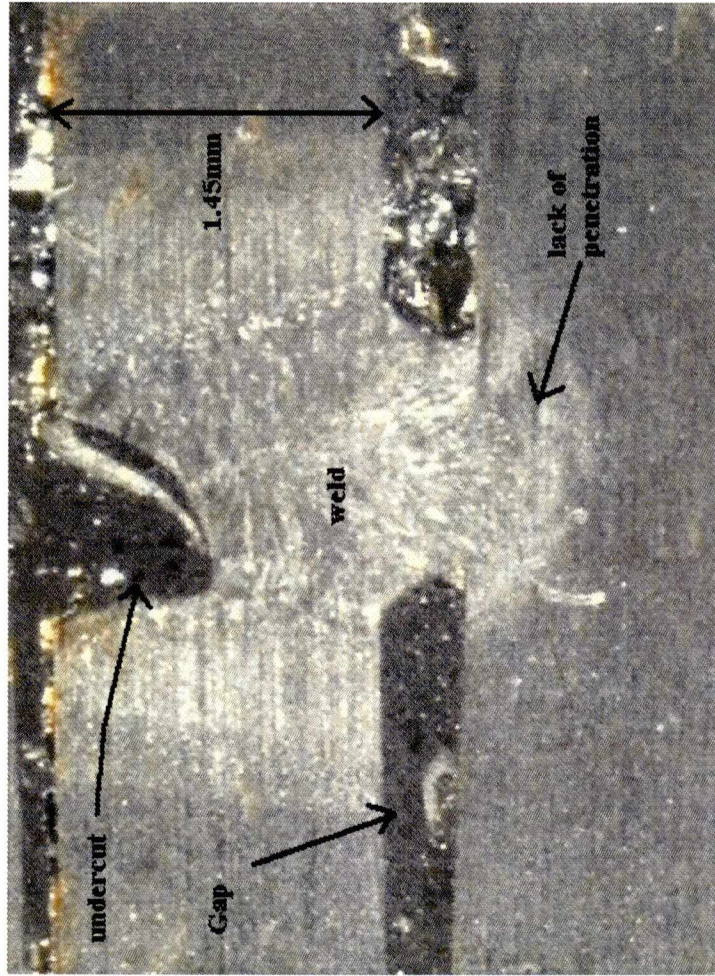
Gap Causing Lack of Penetration and Undercut. Weld performed on 80Y90T autobody component using a CO₂ laser and helium gas (1850W, 1000mm/min., +1mm focal position).
